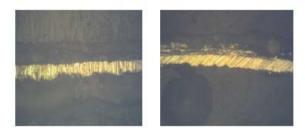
sample picture of the circularity of the drill hole; (a) drill hole with magnet, (b) drill hole without magnet
